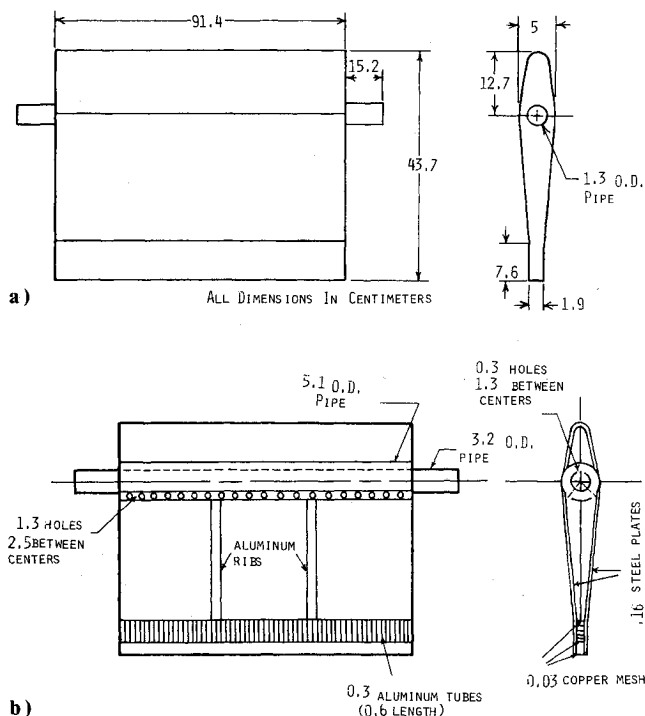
Details of the heated air injector: a) external arrangement, b) internal arrangement.
